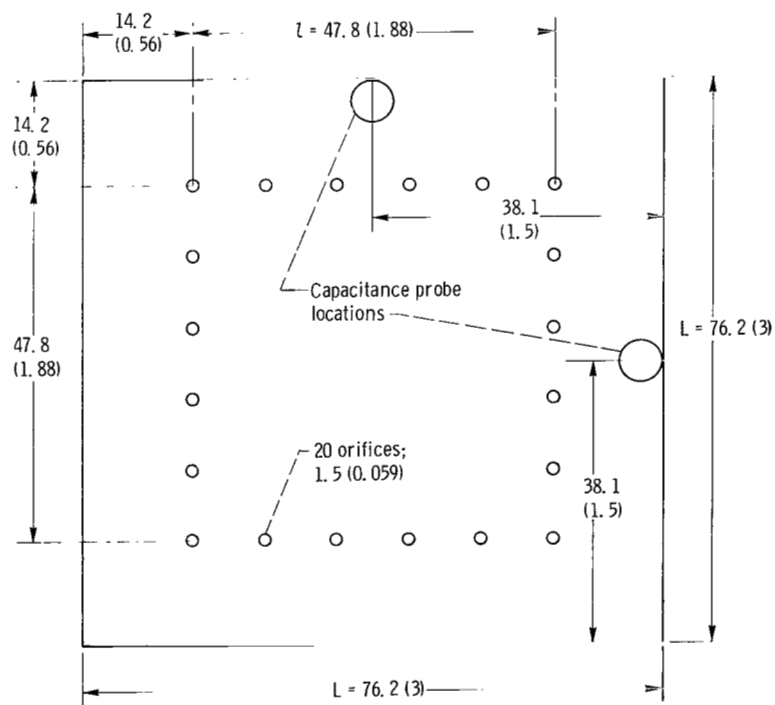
Hydrostatic air damper pad. (All dimensions are in mm(in.))
